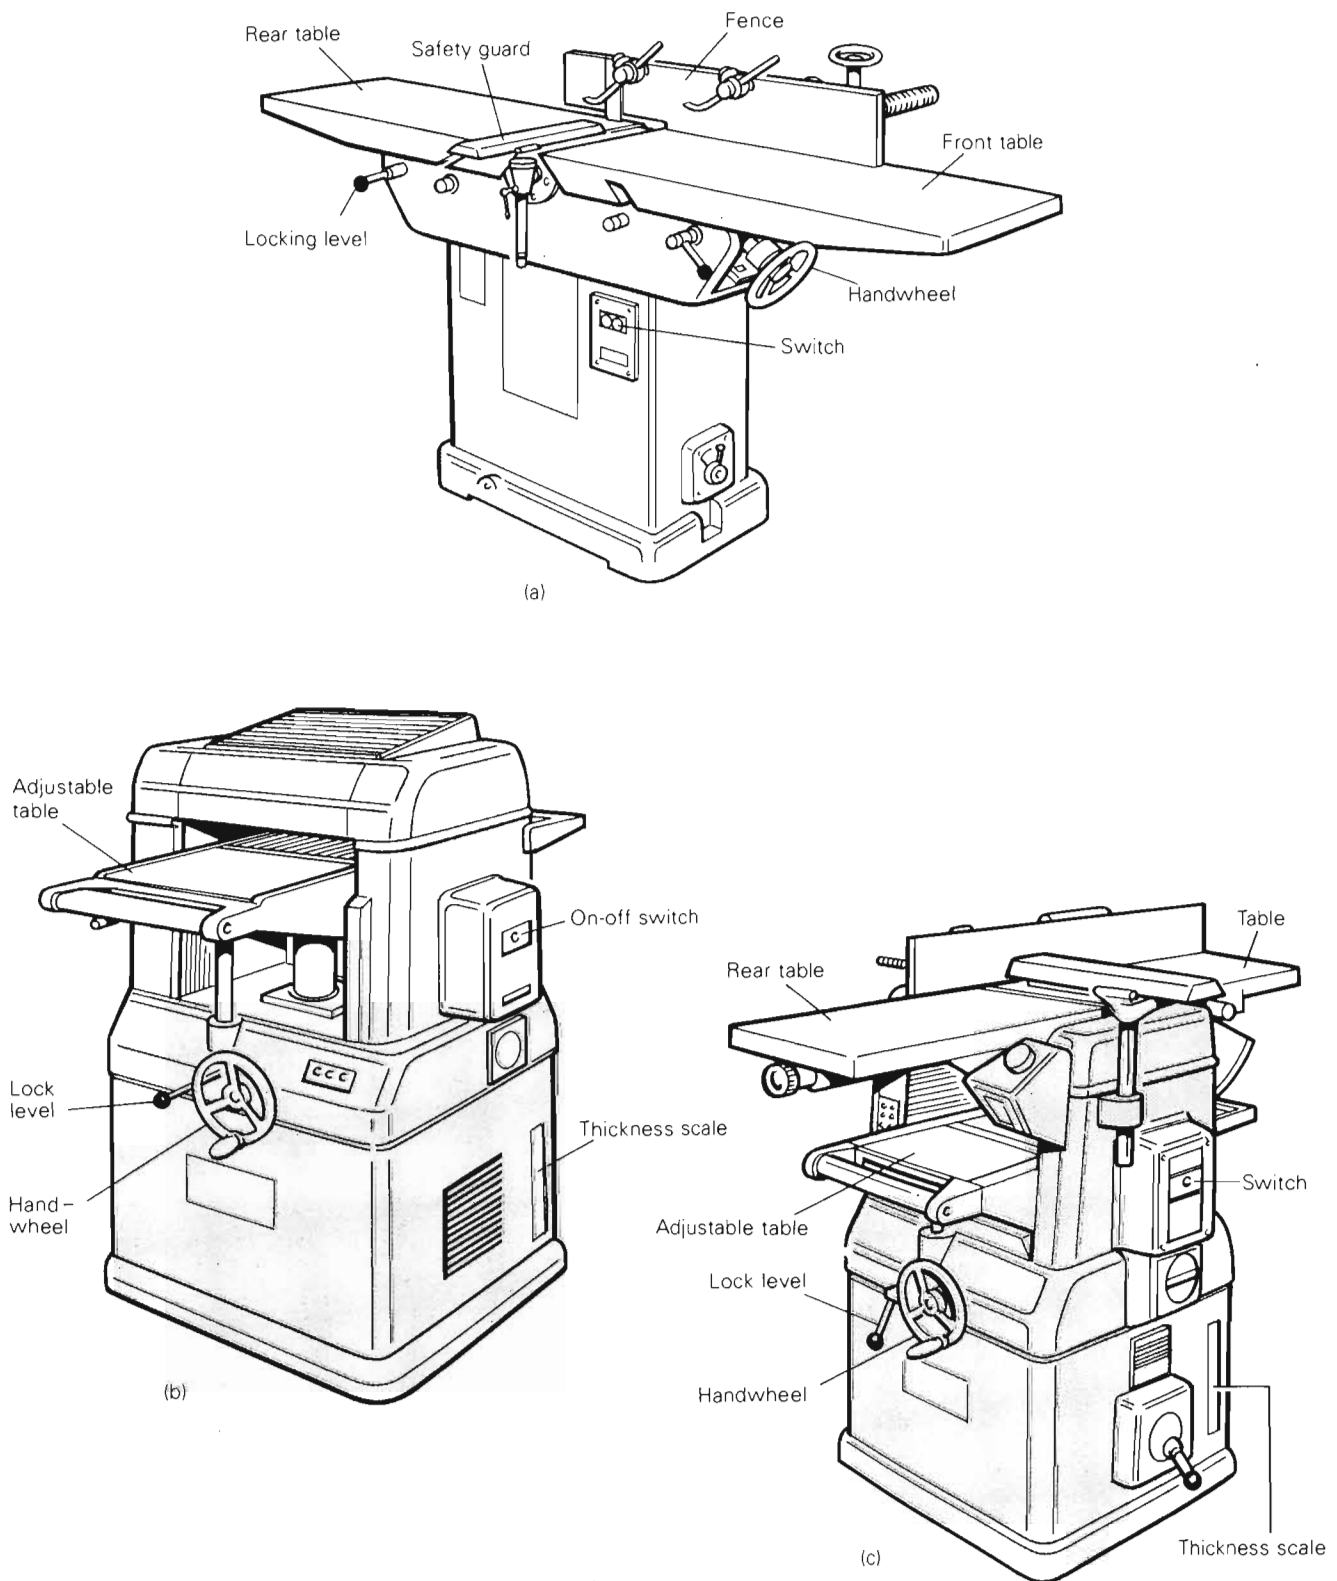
Planers: (a) jointer, (b) thicknesser, (c) combined jointer and thicknesser.
